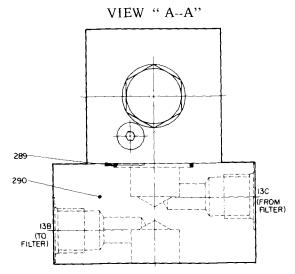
Optional Gear Pump Relief Valve and Optional Filter Manifold. (508644)
